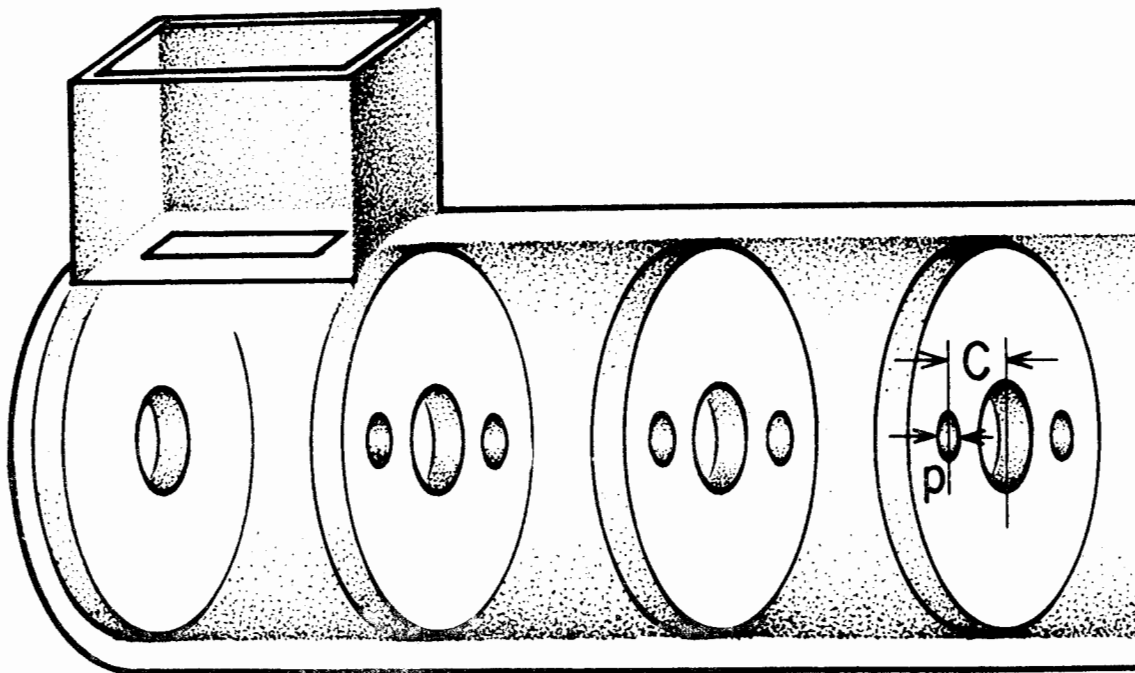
(b)--Schematic drawing of disk-loaded waveguide: disks with suppressor holes.
